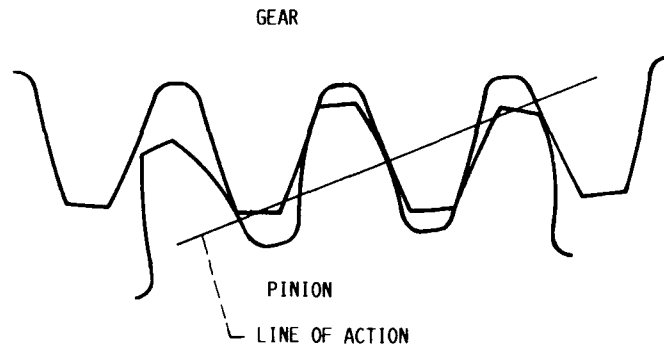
A 24:96 EXTERNAL GEAR REDUCTION WITH THE TEETH IN THE SINGLE CONTACT REGION.
